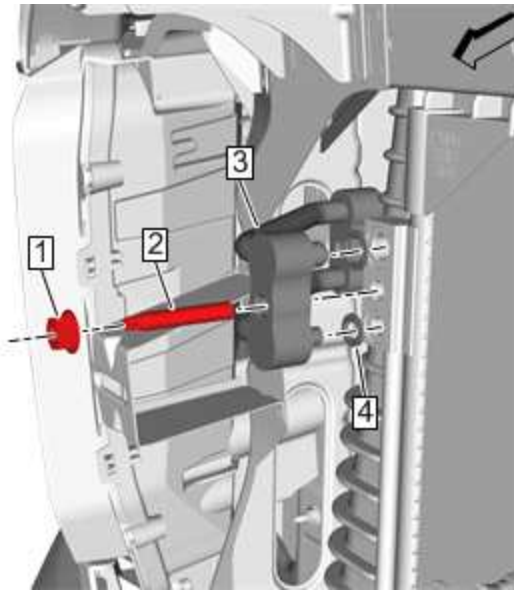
Air Conditioning Evaporative Connector Hose/Tube And Compressor And Condenser Hose Nut
